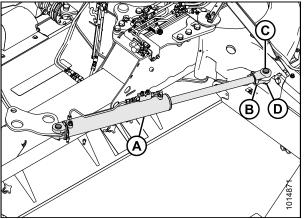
Swing Cylinder (Rear Left-Hand View)
